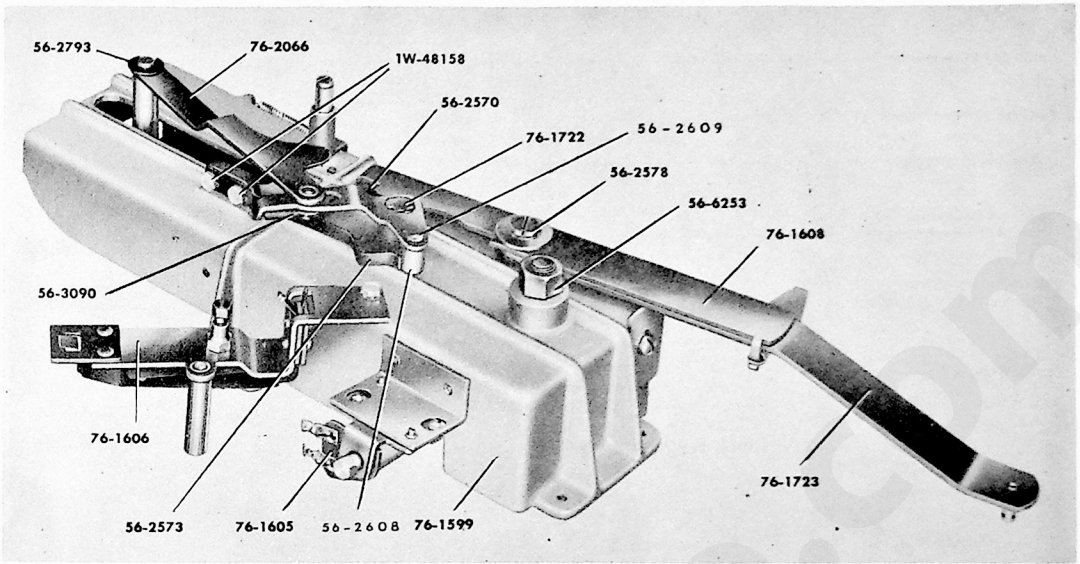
CHANGER MECHANISM ASSEMBLY, UNDERSIDE VIEW.
